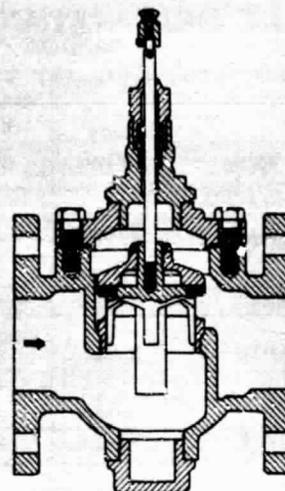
ACCESSORY 250 PSI (1725 kPa) PACKING FOR 1/2 TO 1-1/4 IN. SCREWED BRONZE BODY VALVES
